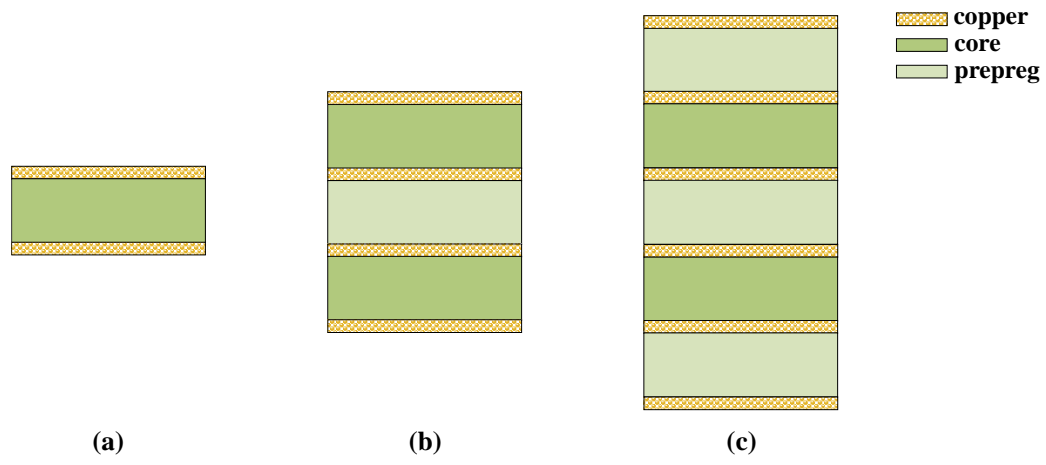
Three examples of sheet grouping achieved with first lamination cycle. (a) Unit of 2-layer PCB stack-up. (b) Unit of 4-layer PCB stack-up. (c) Unit of 6-layer PCB stack-up.
